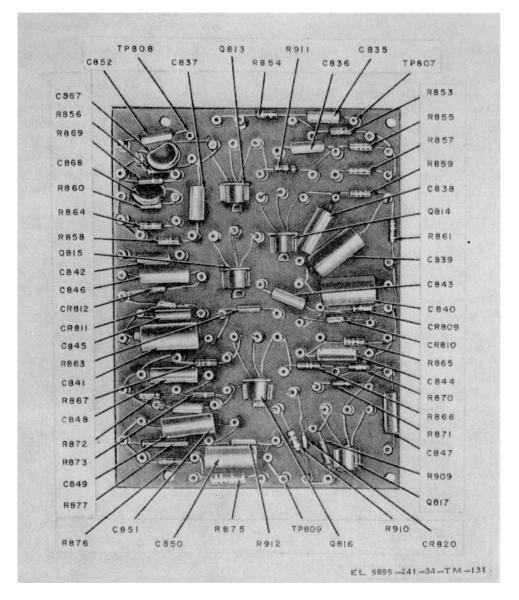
Amplifier Assembly AM-2827/FSW-8, terminal board TB80, parts location.
